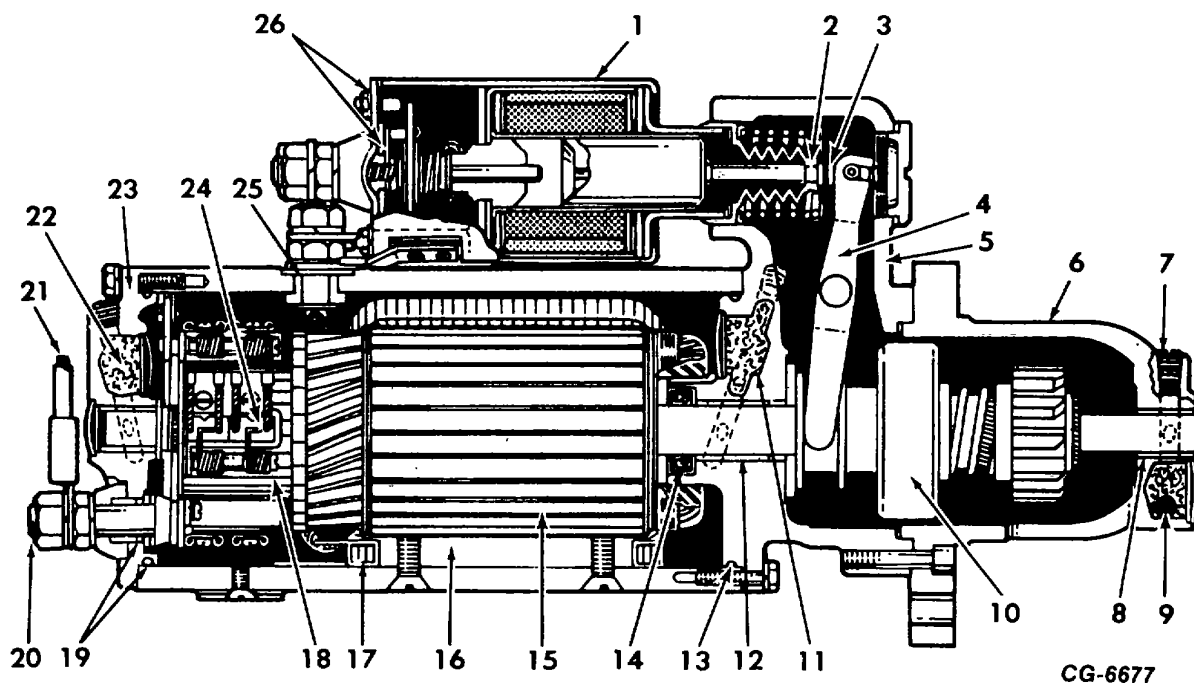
Sectional View of Starting Motor with Heavy Duty Sprag Clutch
